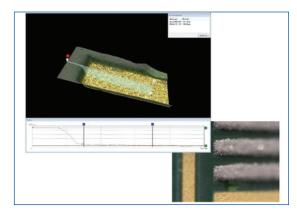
Standard solder mask rolls down to the pad in a consistently sloped plane, permitting robust gasketing.
